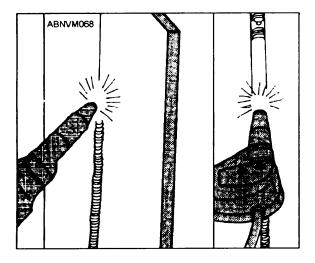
Welding fillet and butt joints in the vertical position.
